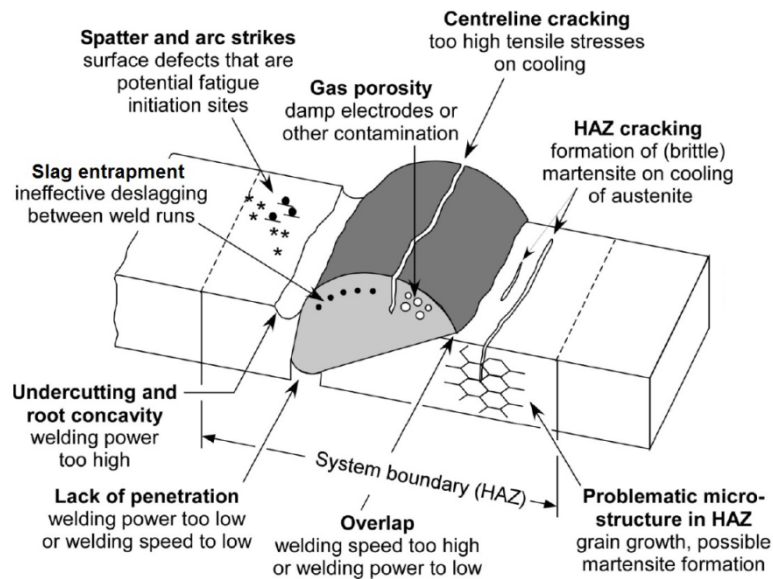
ISO 5817 main flaw types with causes in the welding joints [1.6]
